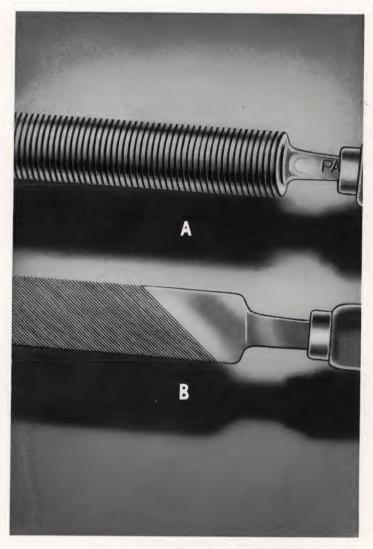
Files: (A) Deeply cut, coarse tooth file; (B) Long-angle lathe file.
